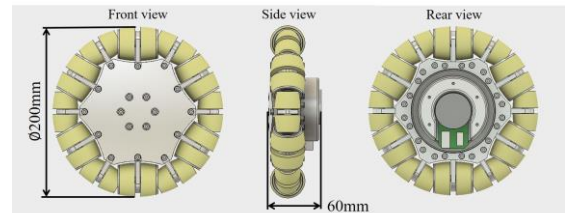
In-Wheel Motor type Omni-Directional Wheel.
